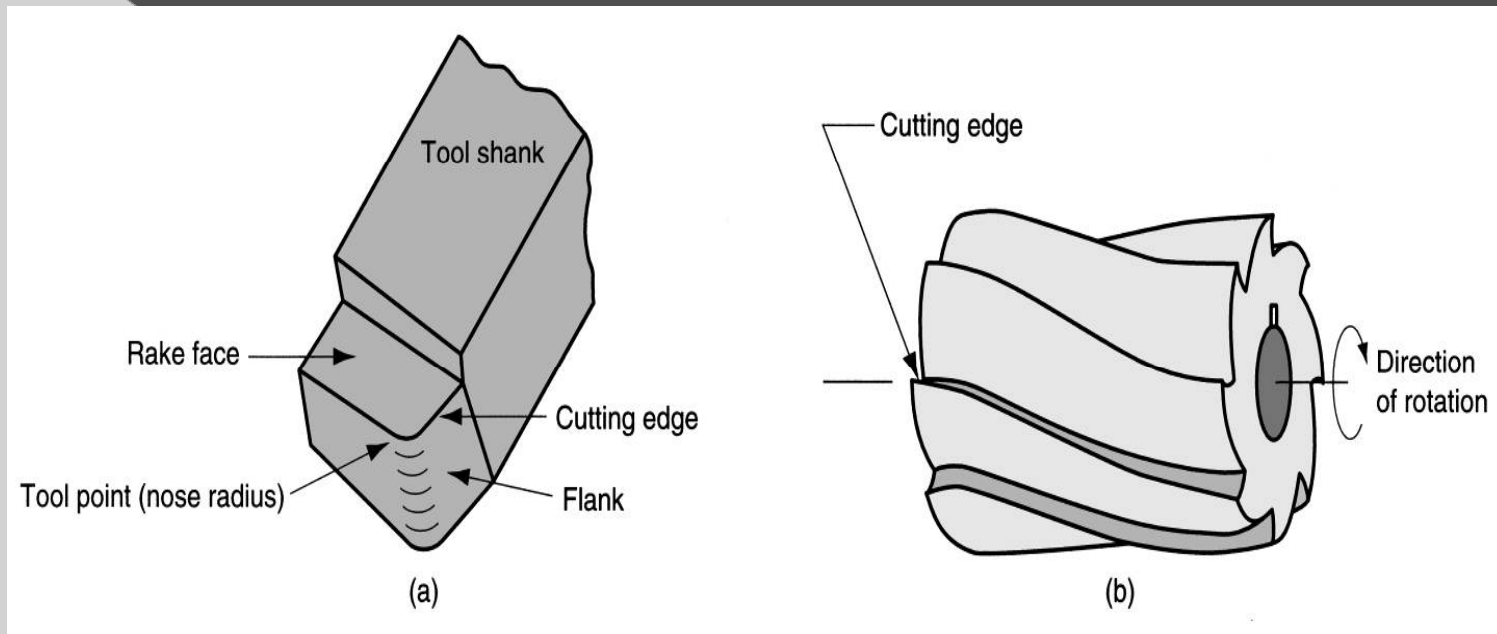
(a) A single-point tool showing rake face, flank, and tool point; and (b) a helical milling cutter, representative of tools with multiple cutting edges.
